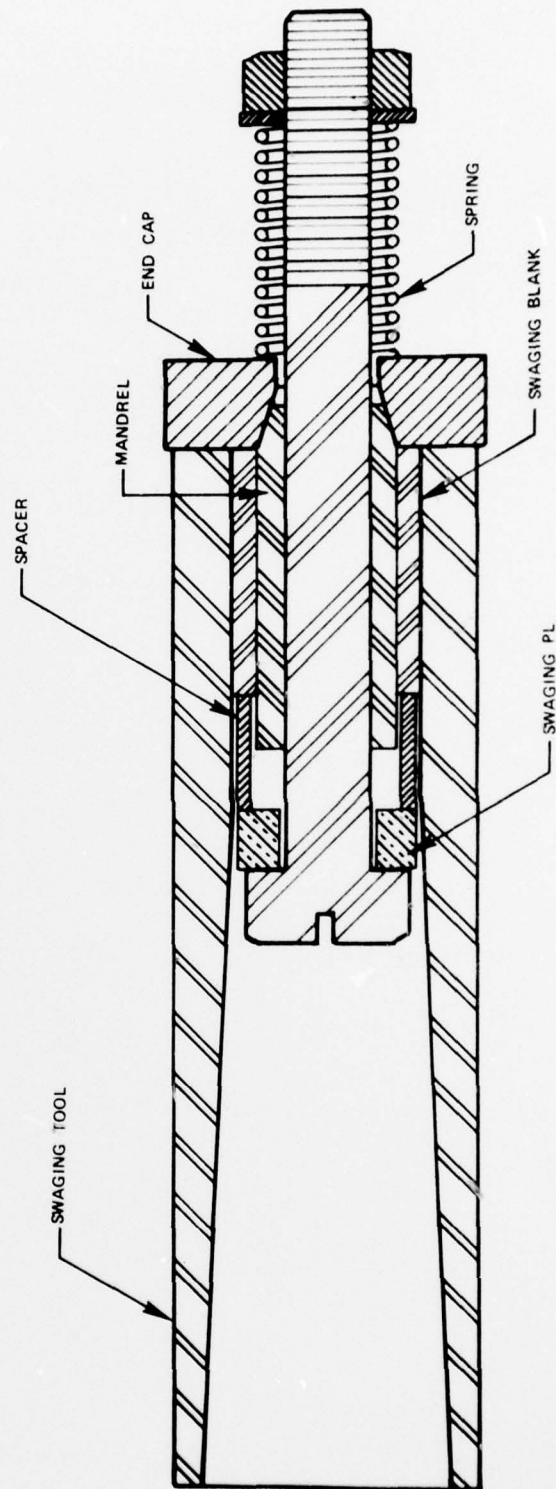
Cross Section of Sleeve Swaging Assembly with Mandrel
